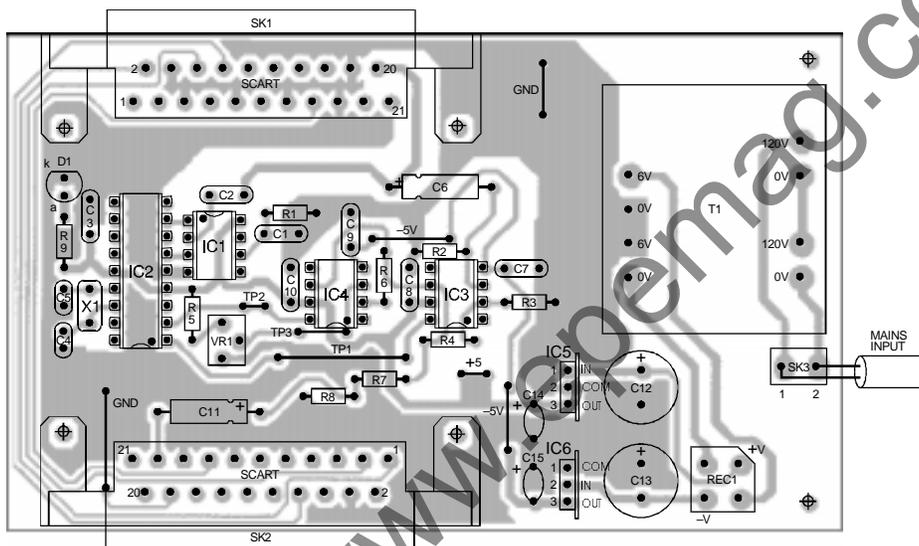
Printed circuit board component layout and (approximately) full-size copper foil master pattern for the PIC Video Cleaner. The SCART sockets are bolted to the PCB via small right-angle brackets.
